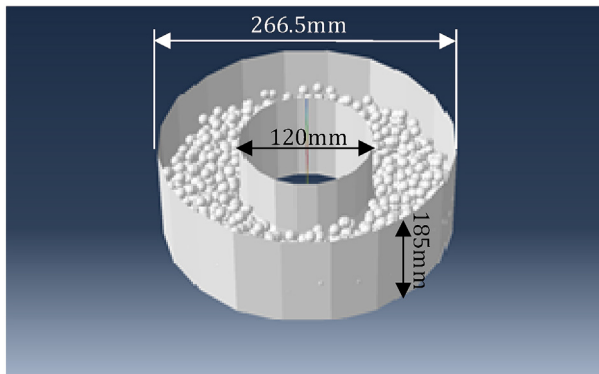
A three-dimensional vibratory finishing machine model with media using ABAQUS/Explicit.
